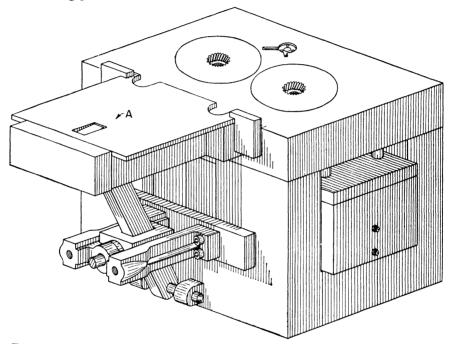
Die with spiral cores used to cast bevel gears, in the injection position.
